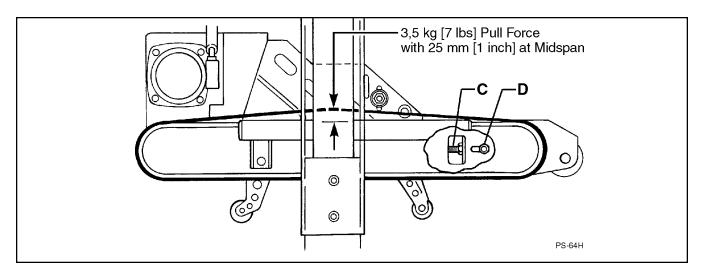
Belt Tension Adjustment, Upper Belt(s)
